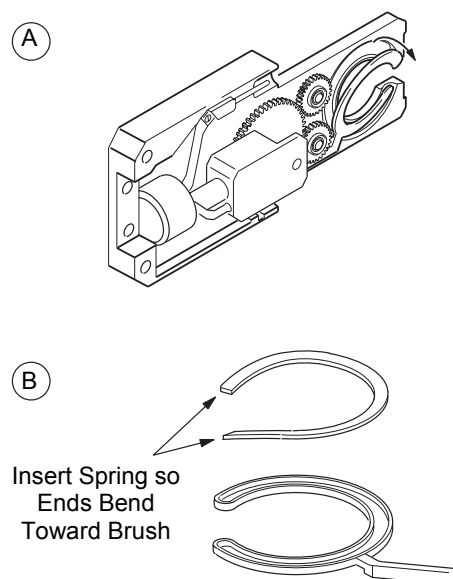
Lifting the Weld Head Brush for Cleaning
